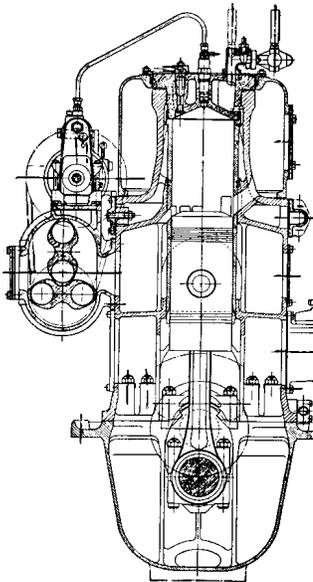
M.A.N. 6.3 in. \times 10.2 in., 600 Rpm Engine with Expansion Chamber Surrounding the Cylinders.
